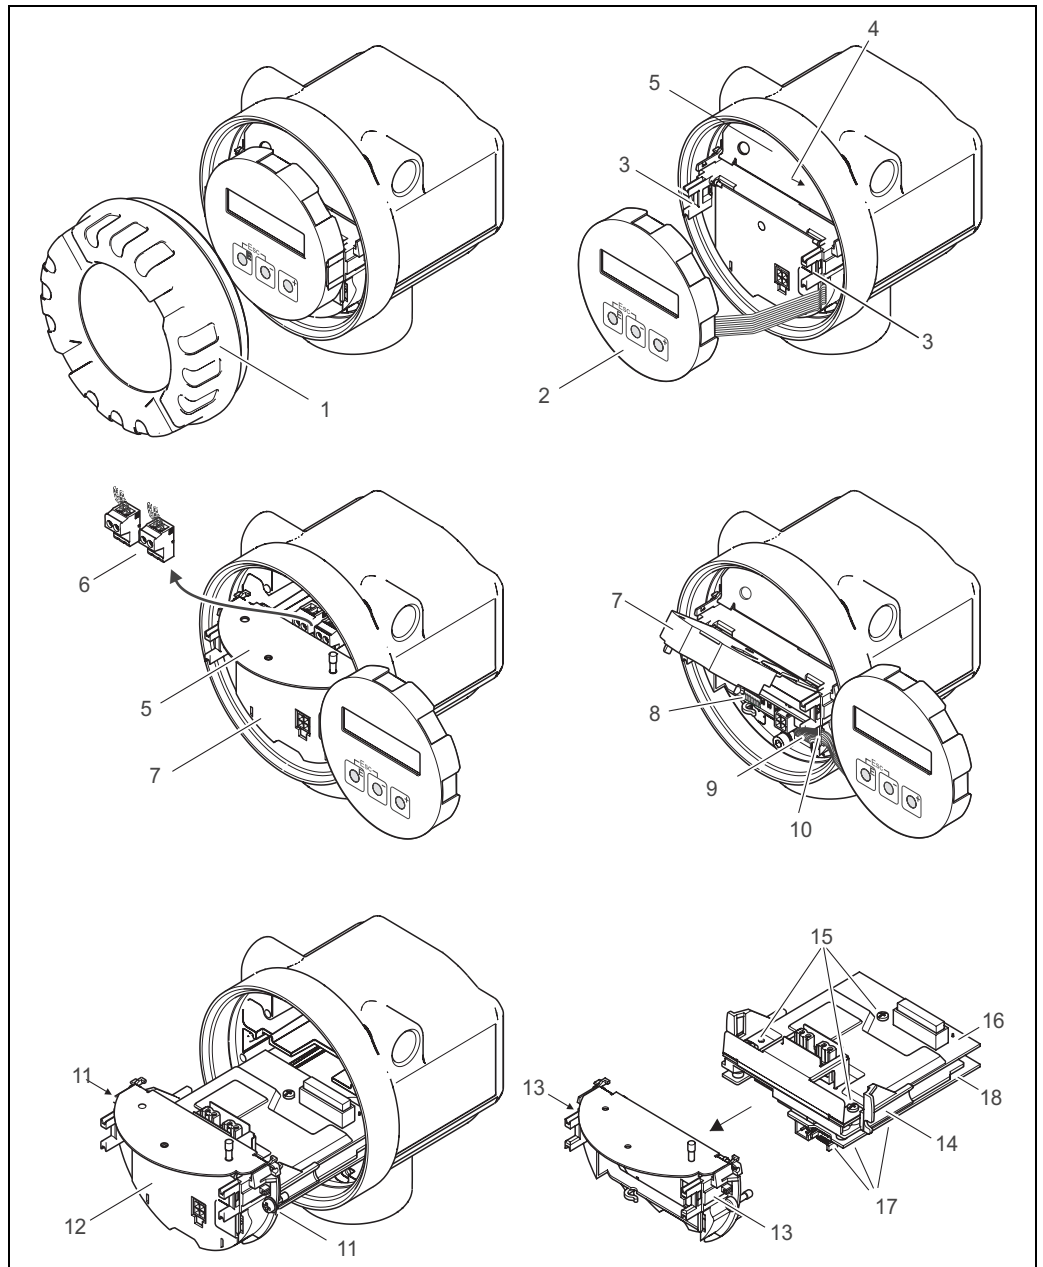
Installing and removing electronics boards, non-Ex/Ex-i version
